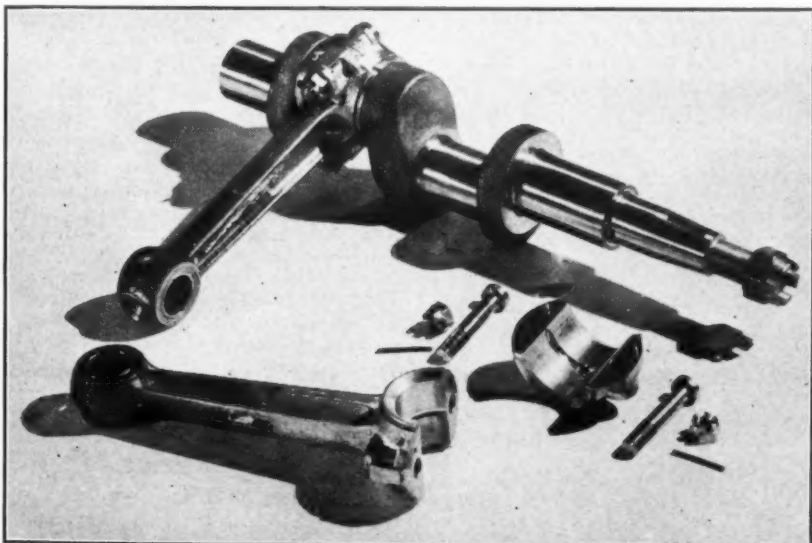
shows the crankshaft and connecting rod assembly used in York commercial condensing units.
